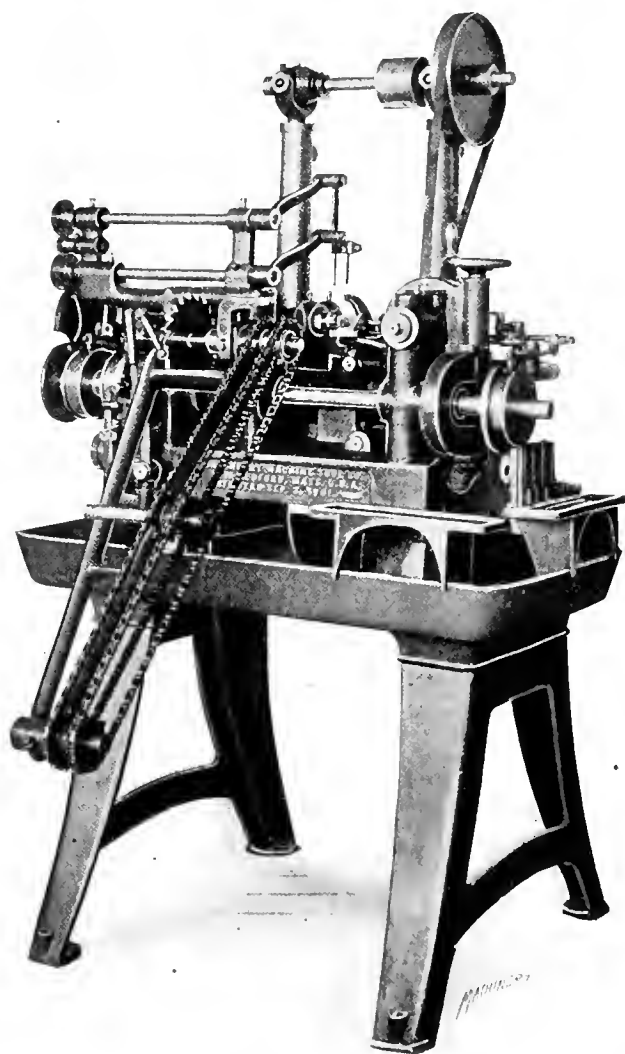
Automatic Machine for Drilling Needle Holes for Lantern Pinions
